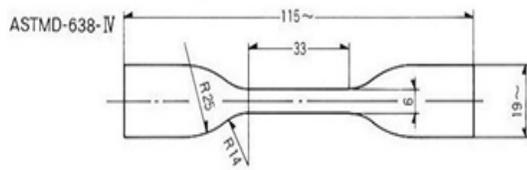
Design of the Test specimen as per ASTM D638 IV.
